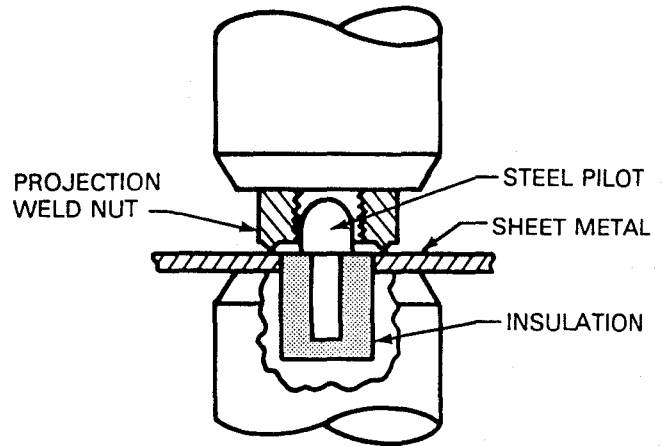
Use of an Insulating Pin to Locate a Weld Nut
